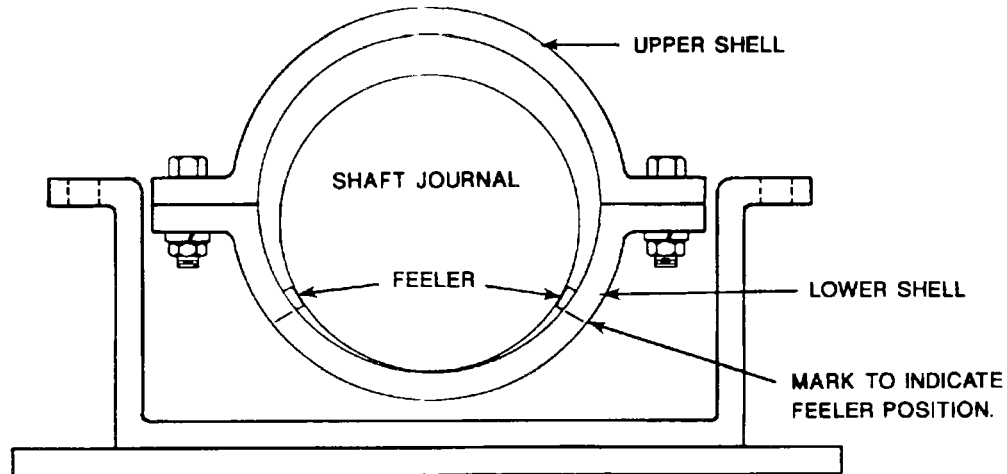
Ring-Oiled Bearing Feeler Positions
